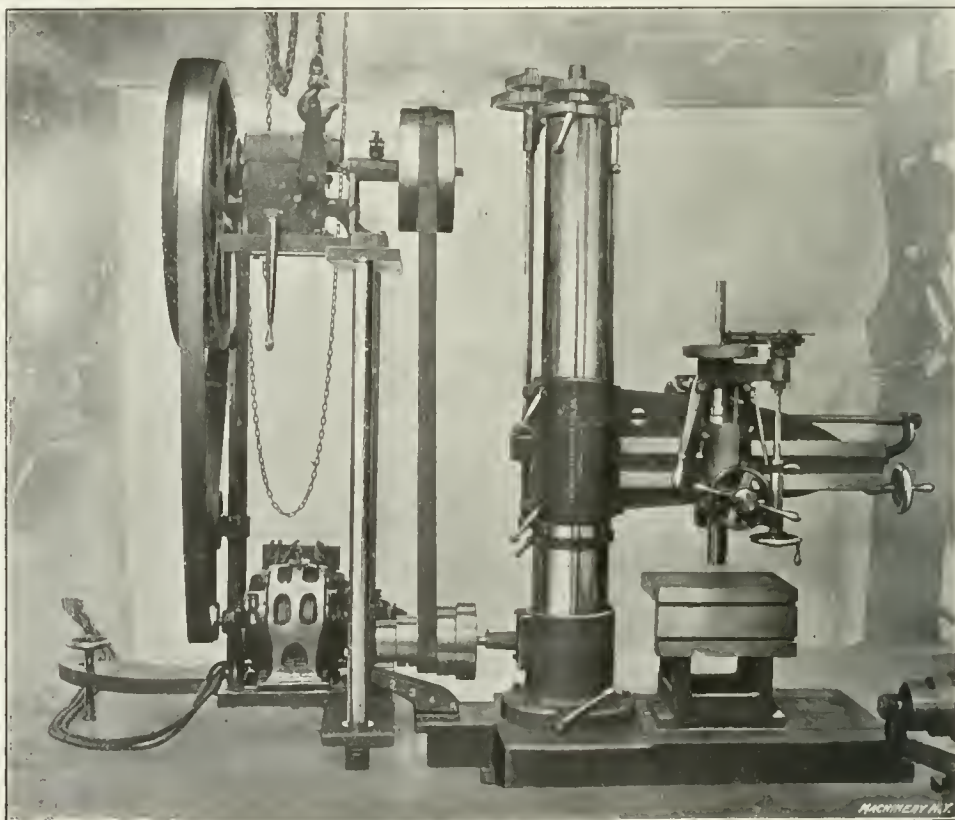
Testing Stand used for Driving a Radial Drill while Testing on the Assembling Floor
